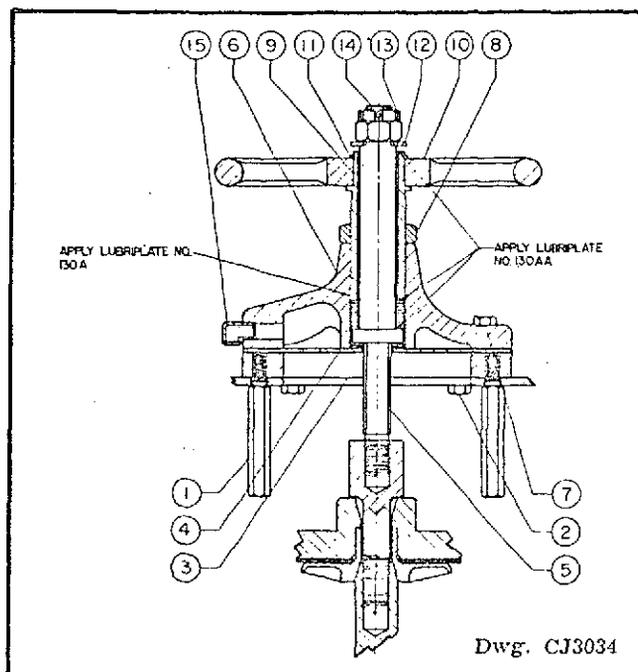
Type P-2 top mounted handwheel assembly for Sizes 45, 50 and 60 actuators.
